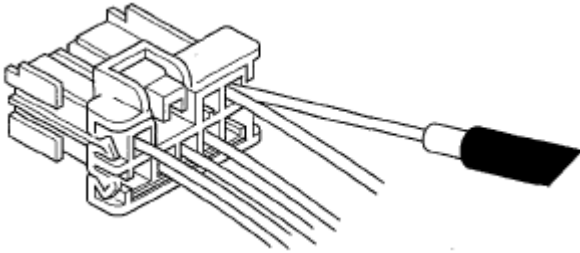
Inserting Probe Of Tester Wire Side Connector
